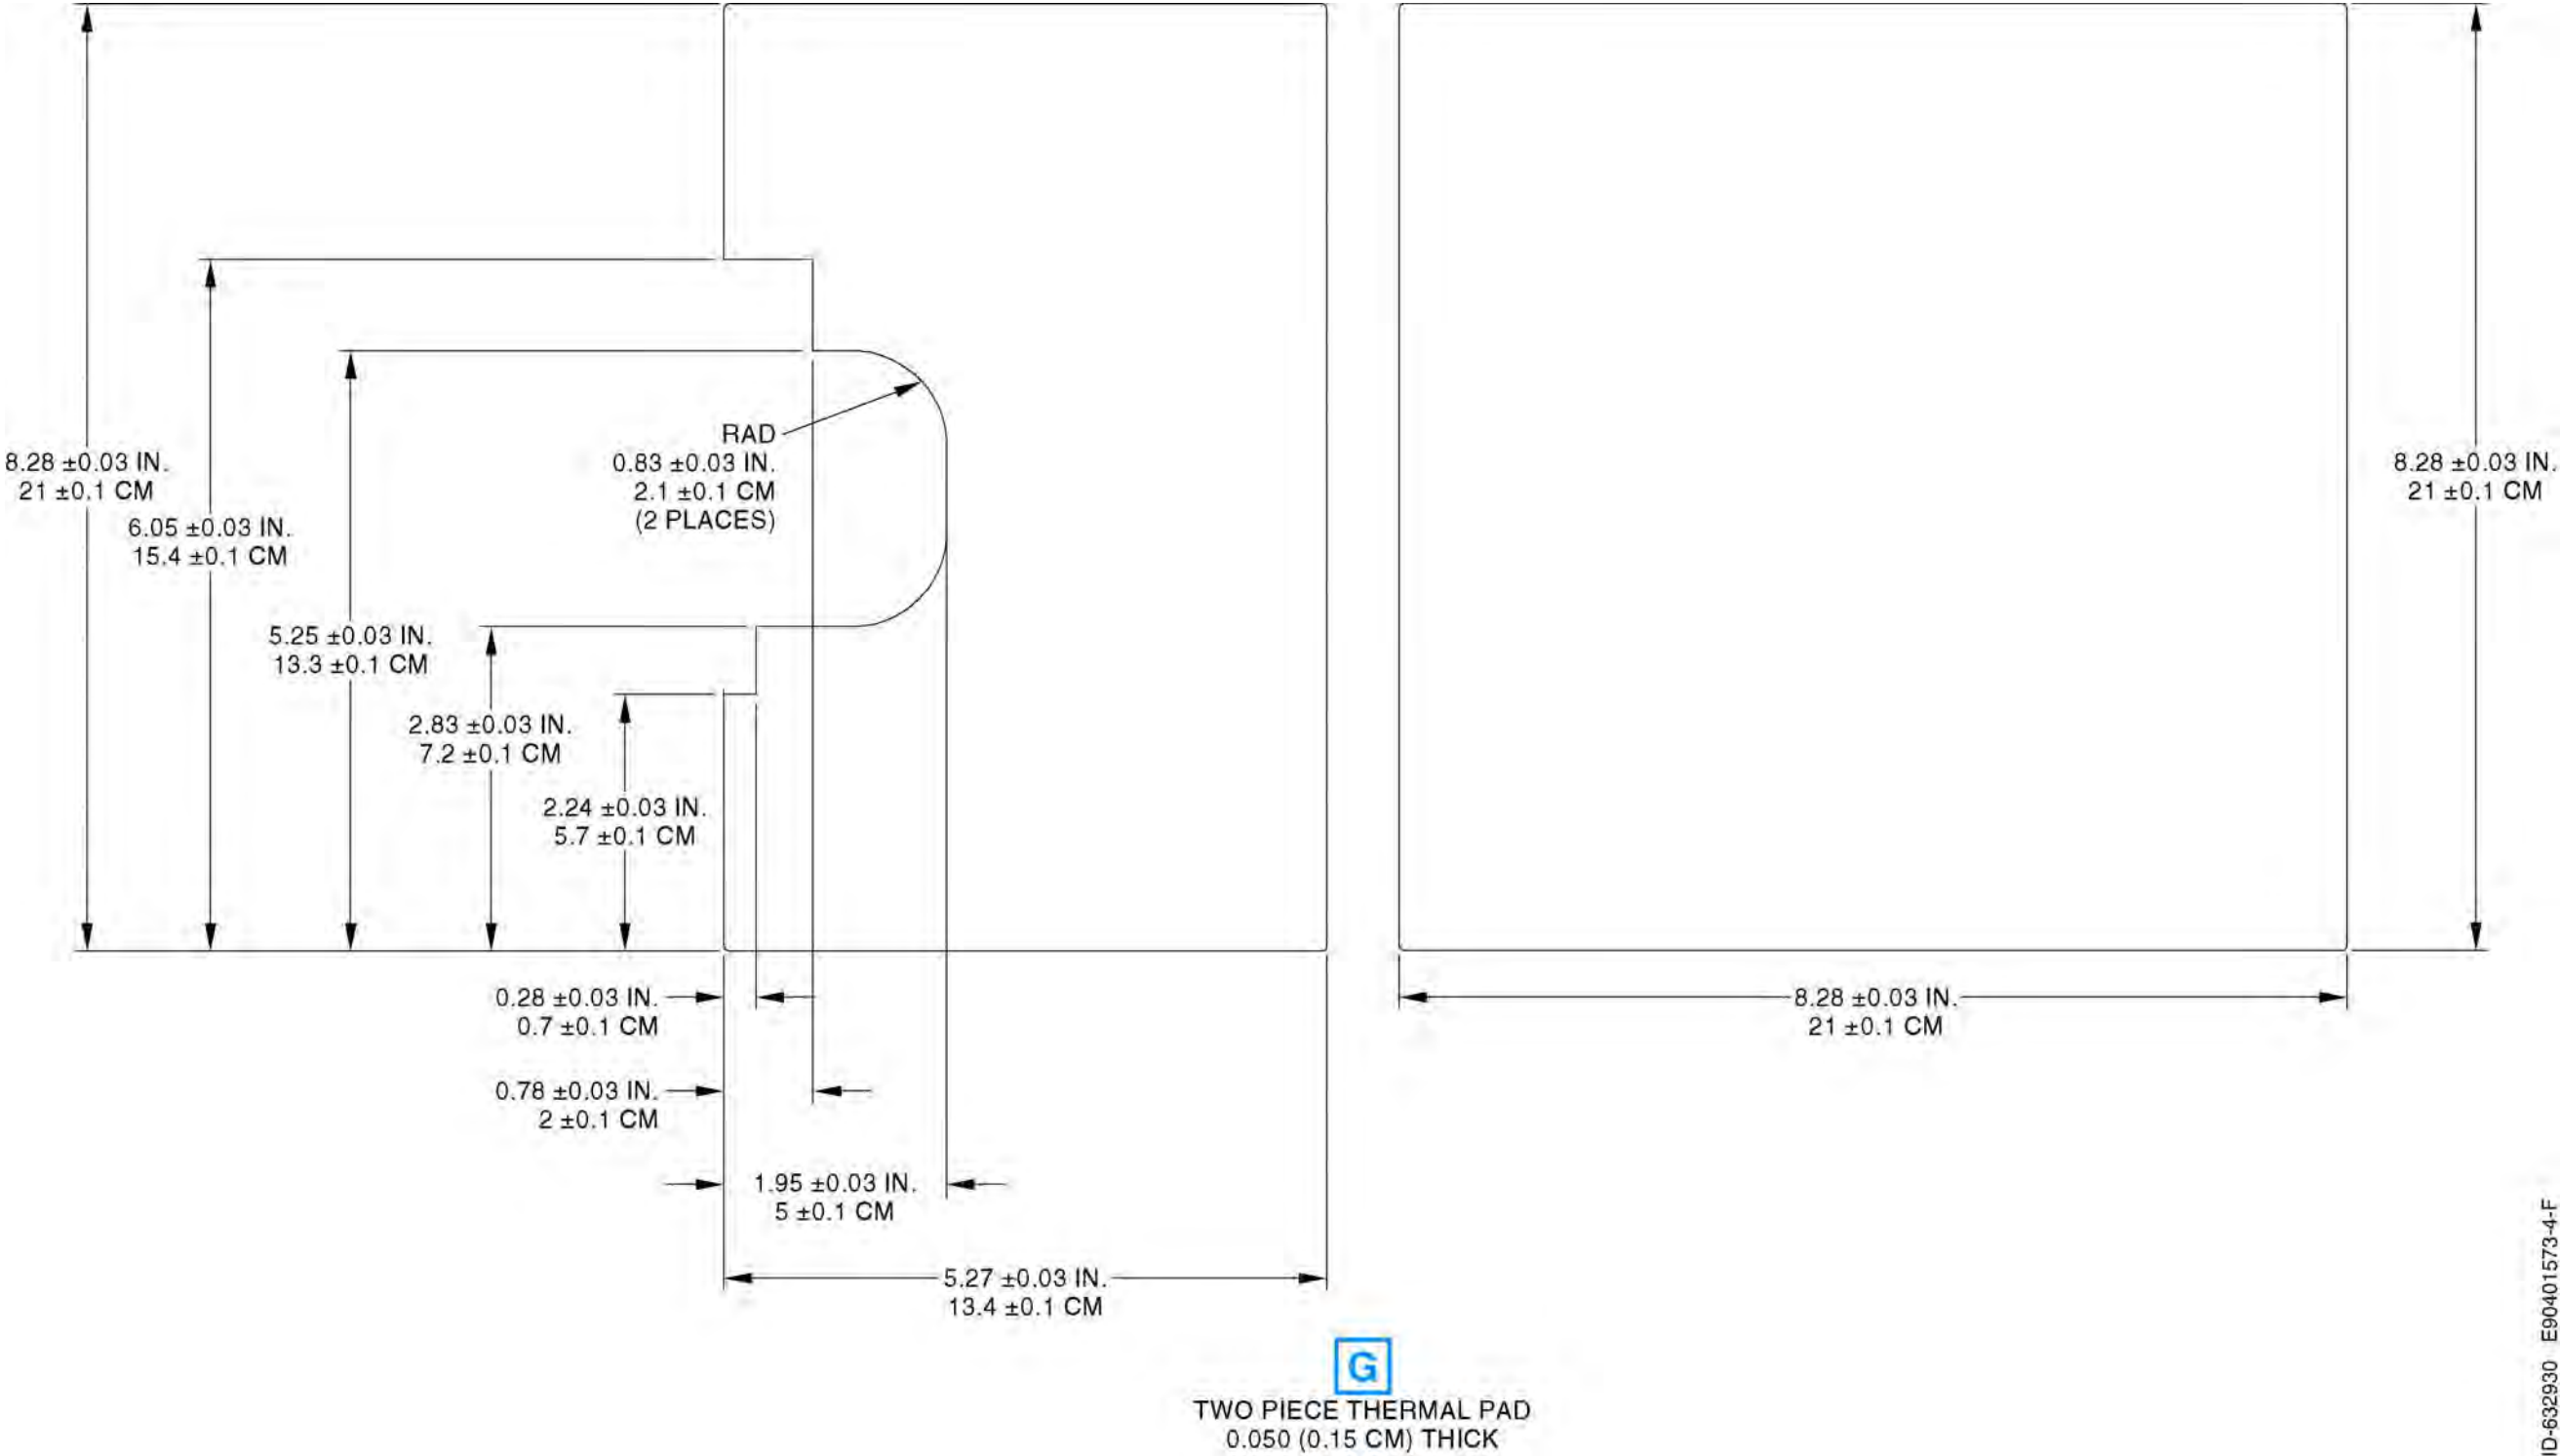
(Sheet 9 of 9) KRFU, Conduction-Cooled 1, Outline and Installation Drawing (90401573, REV F)
